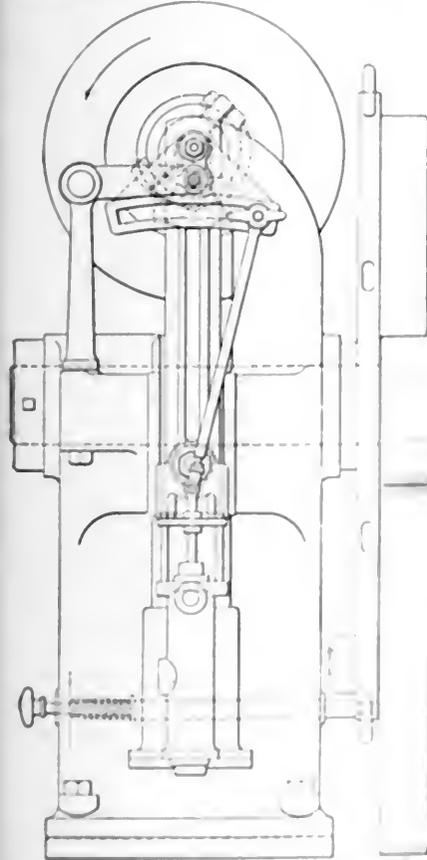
FINK GEAR ON REVERSIBLE HERRING ENGINE
